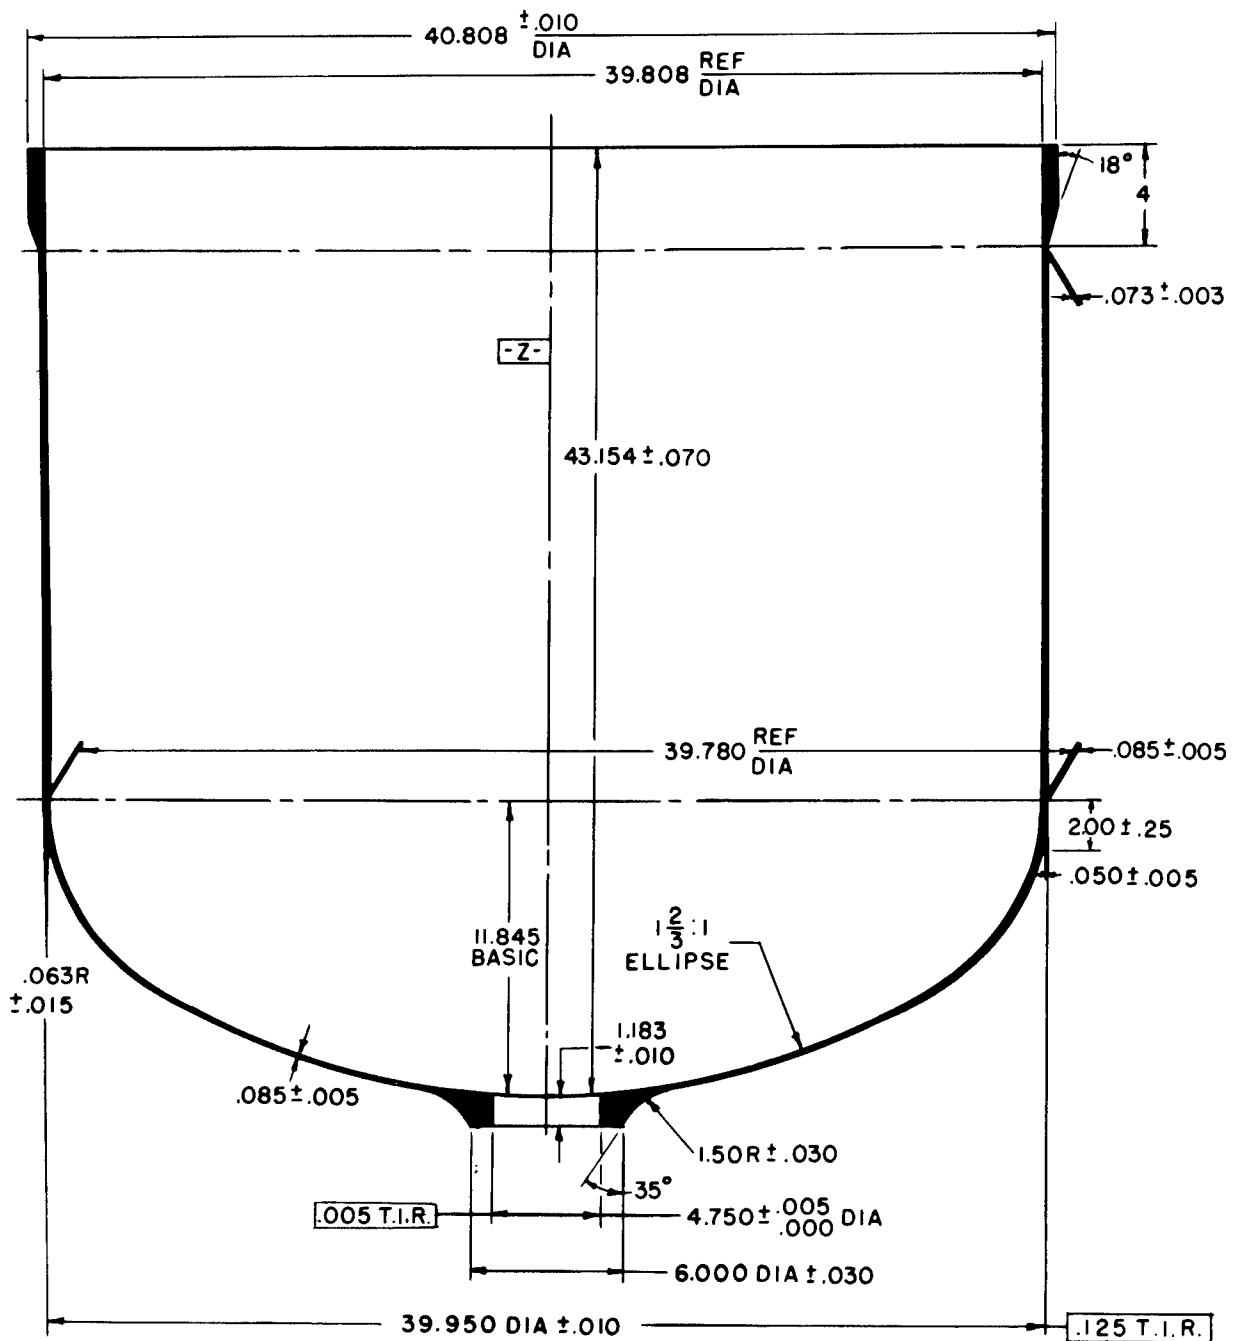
Drawing of 40 Inch Diameter Model Pressure Vessel.
